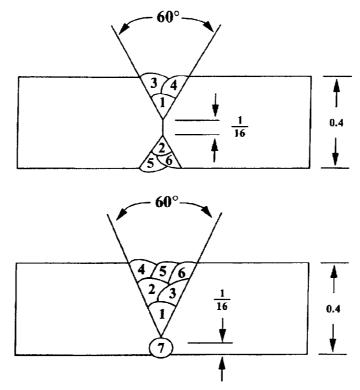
Sequence of GTA weld passes for single and double vee specimens.
